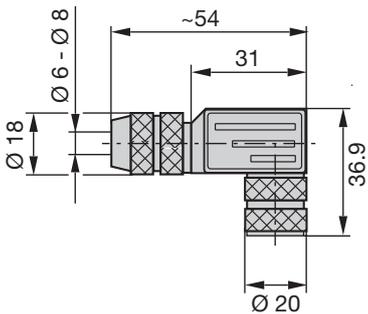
Connector BKS-S104-00 (socket) for BUS IN
